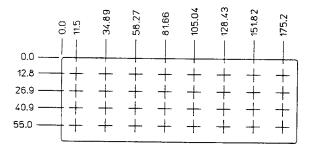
MODULE REAR 32 COMPONENT GRIDWORK, 4 SLOT MODULE
